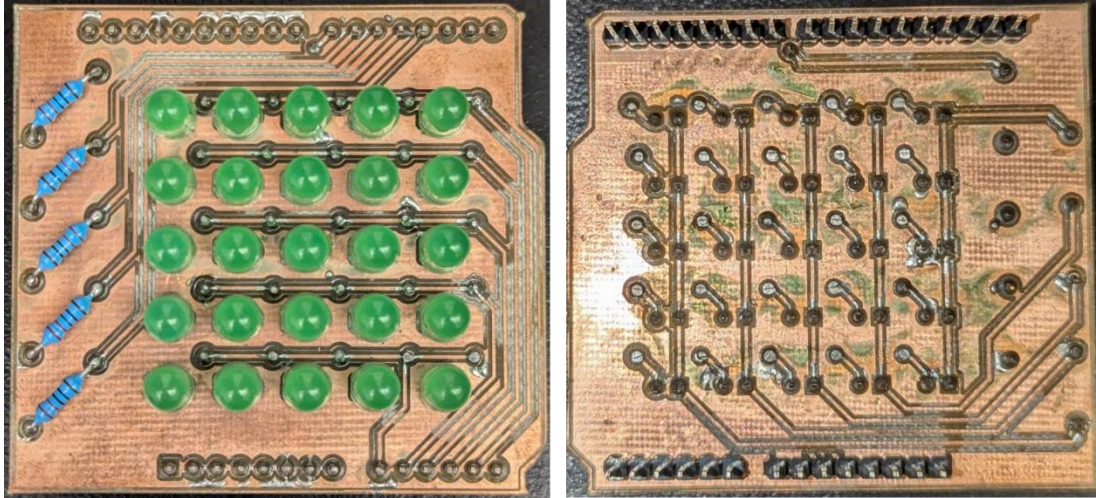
5×5 PCB (LEFT) Top (RIGHT) Bottom
